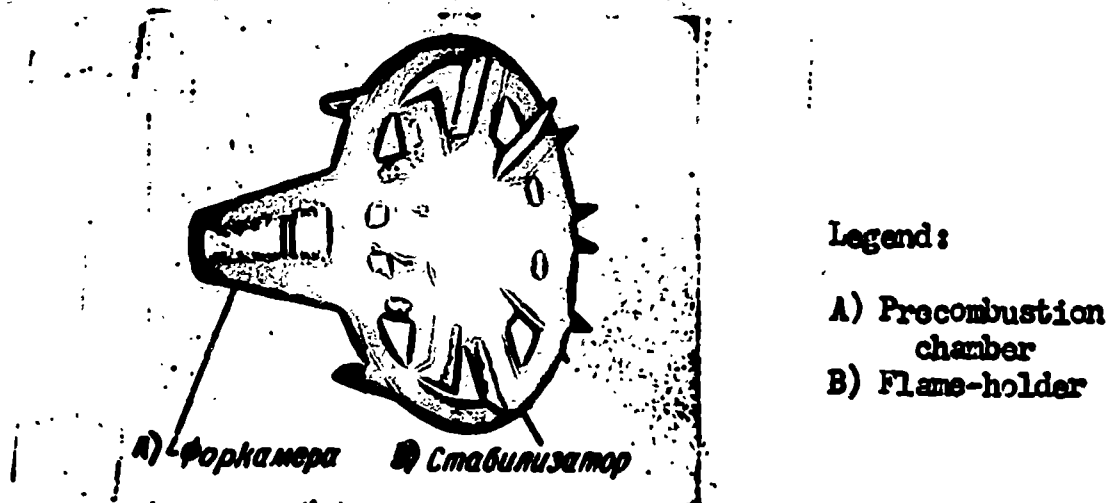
An external view of a pre-combustion chamber with a ring-shaped flame-holder.
